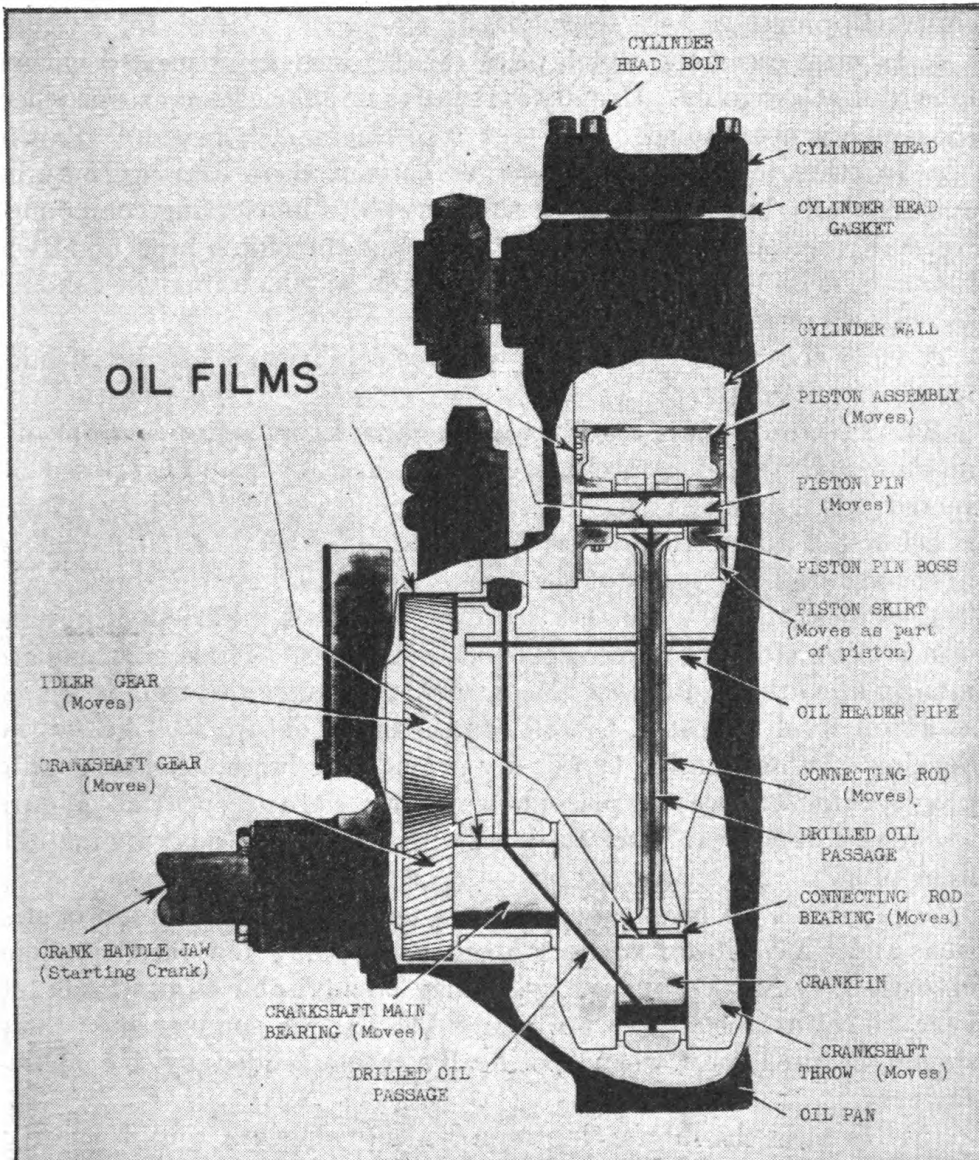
Engine lubrication; oil films (moving parts indicated by word "moves").
